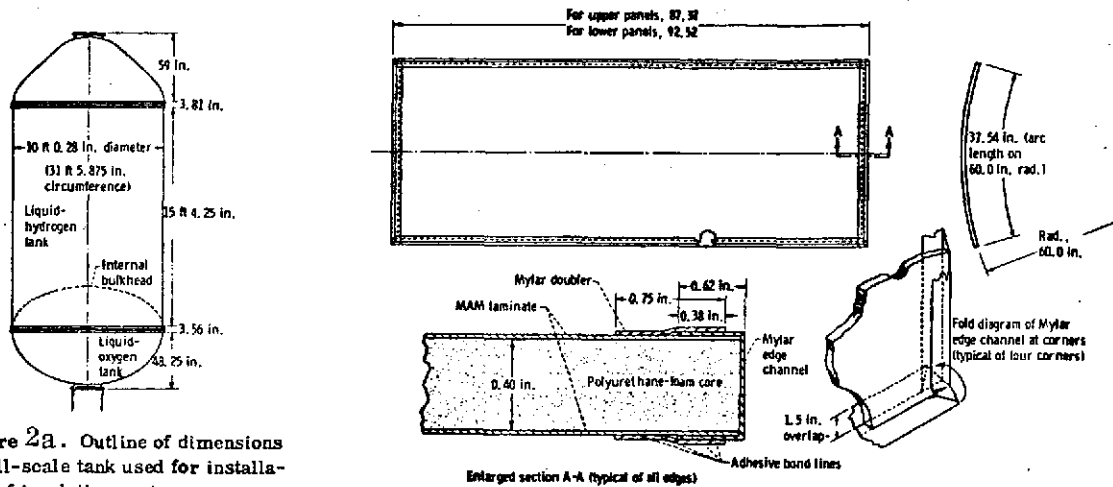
Outline of dimensions of full-scale tank used for installation of insulation system.
